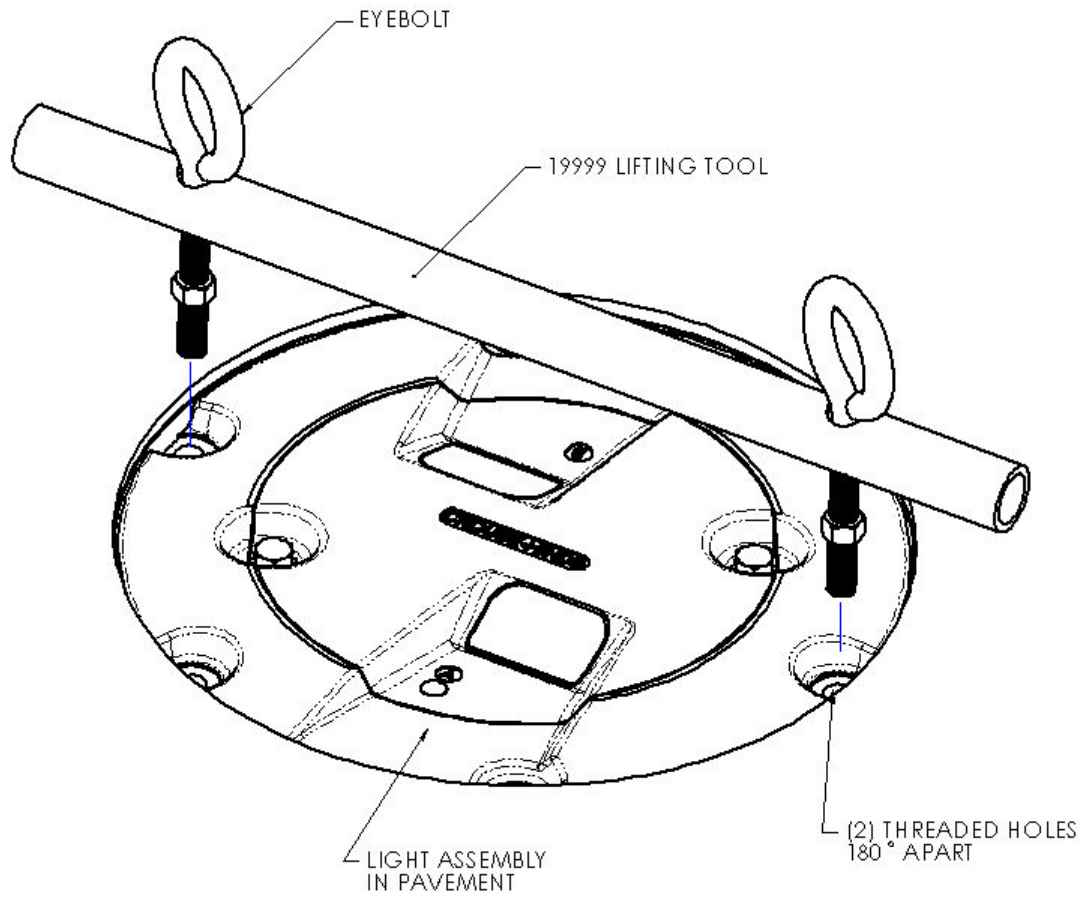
19999 Installation (Lifting) Tool (TCL Fixture Shown)
